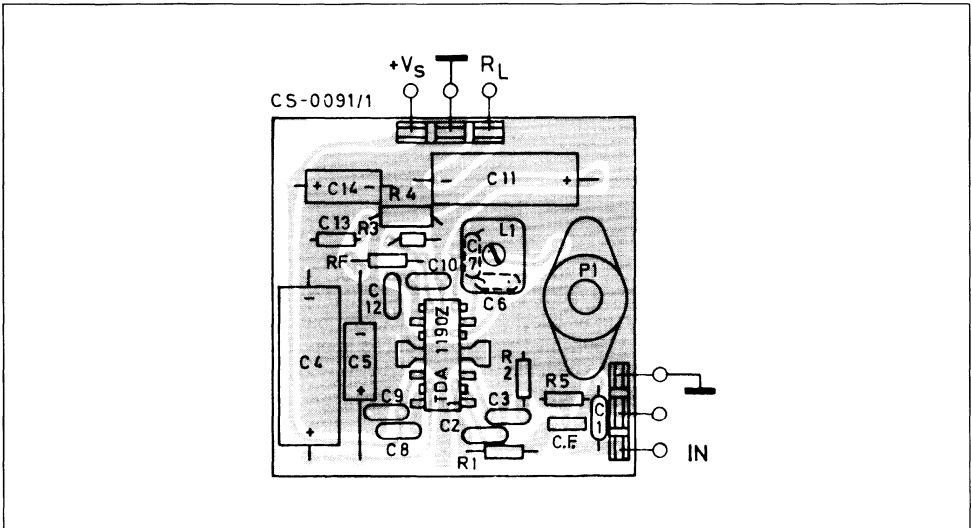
P.C. Board and Component Layout of the Circuit Shown in Fig. 16.
